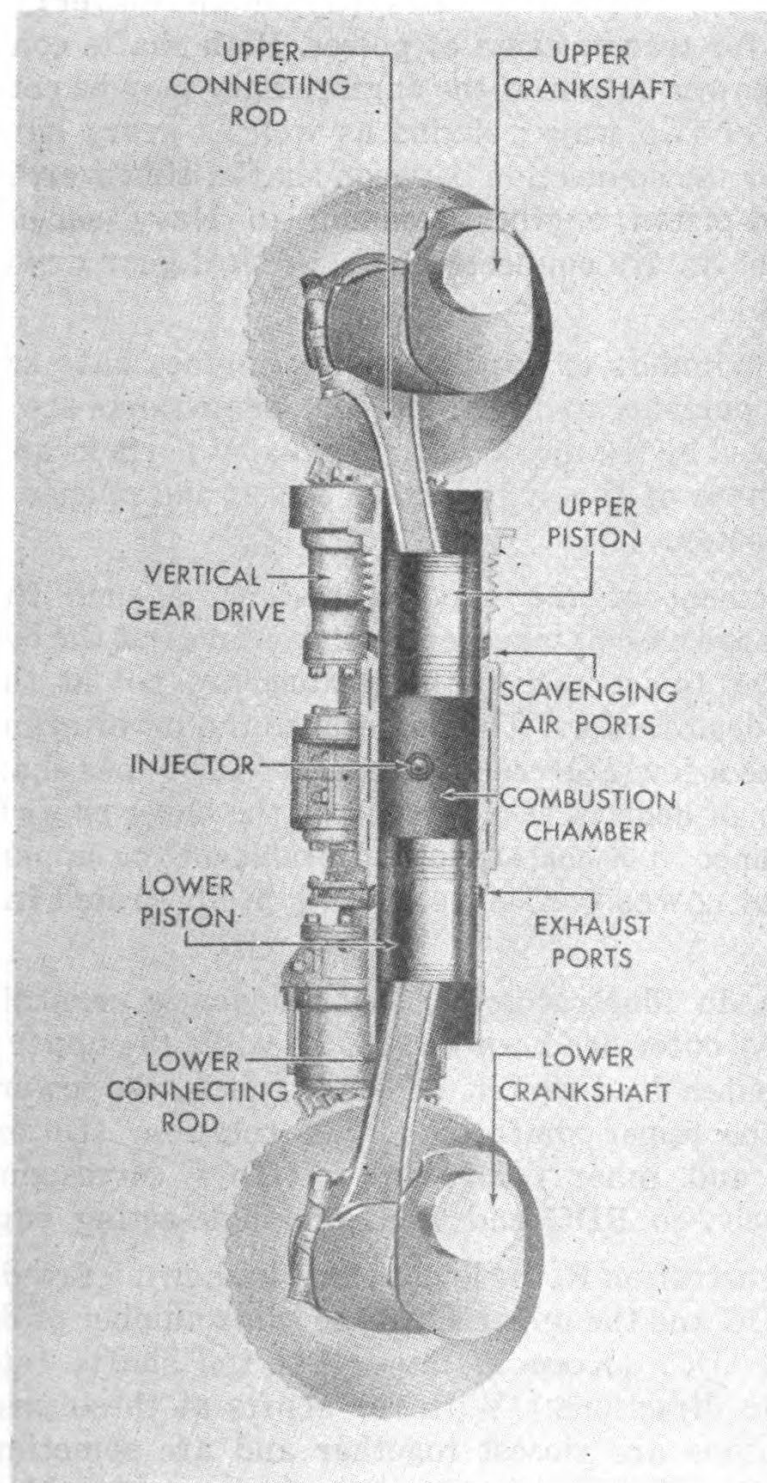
Cylinder and related parts—opposed-piston engine.
